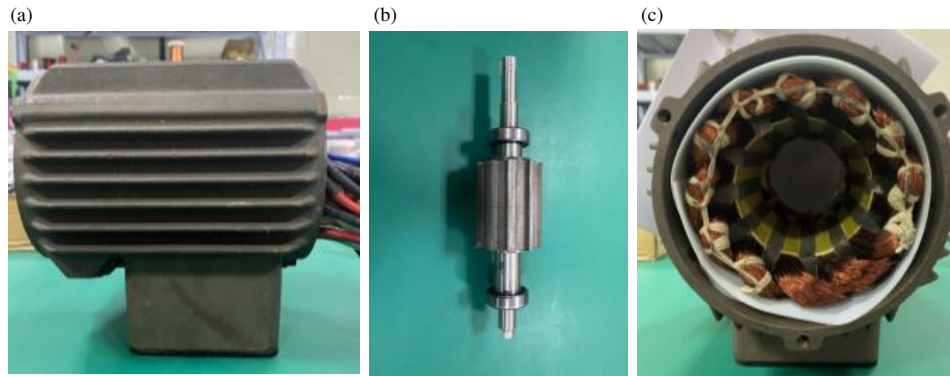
Prototype. (a) Motor housing. (b) Rotor. (c) Stator winding.
